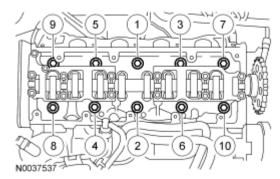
Cylinder Head Bolt Torque Sequence Courtesy of FORD MOTOR CO.
